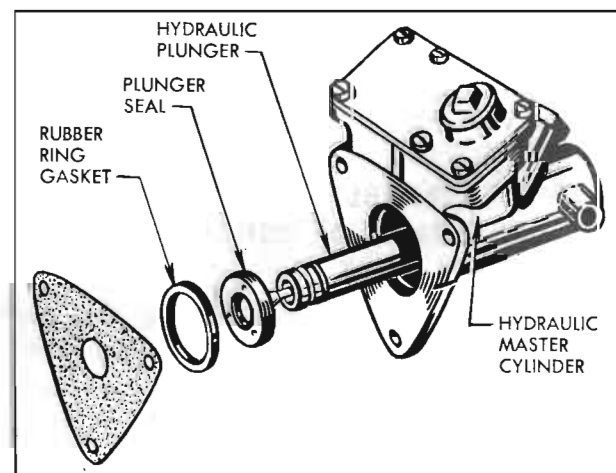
Removing Vacuum Cylinder from Hydraulic Cylinder
